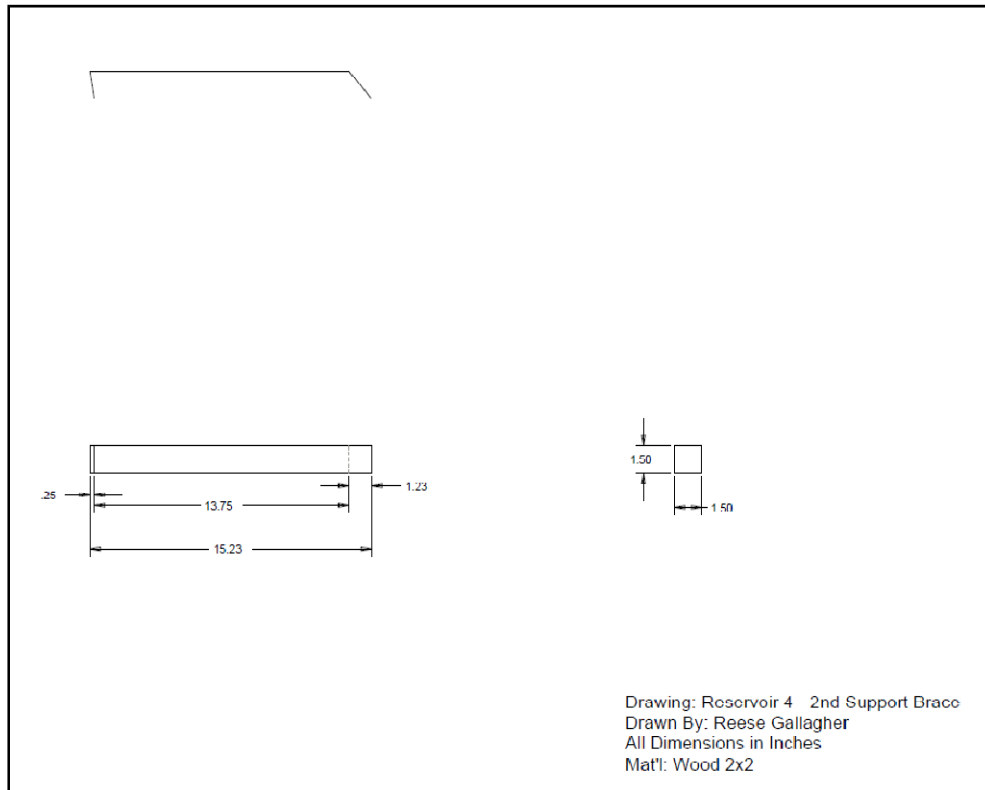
Reservoir 4 2nd Support Brace (prt. 1) dimensional drawing
